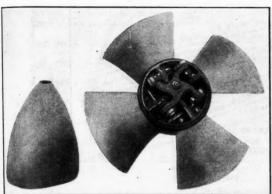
Kaplan Runner at Siebenbrunn Plant, Showing Mechanism for Moving Pivoted Blades.
